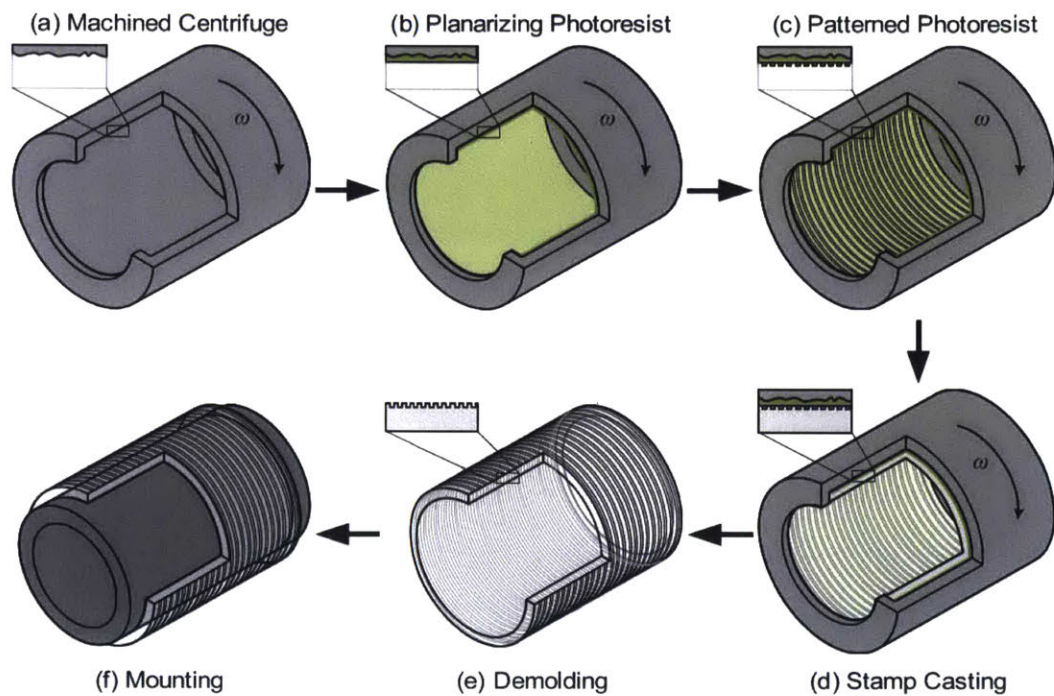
Seamless cylindrical stamp fabrication process.* The steps to fabricating a seamless stamp involve creating a planarizing SU-8 layer (b); patterning a layer of AZ 9260 (c); and casting and curing PDMS (d). [5]
